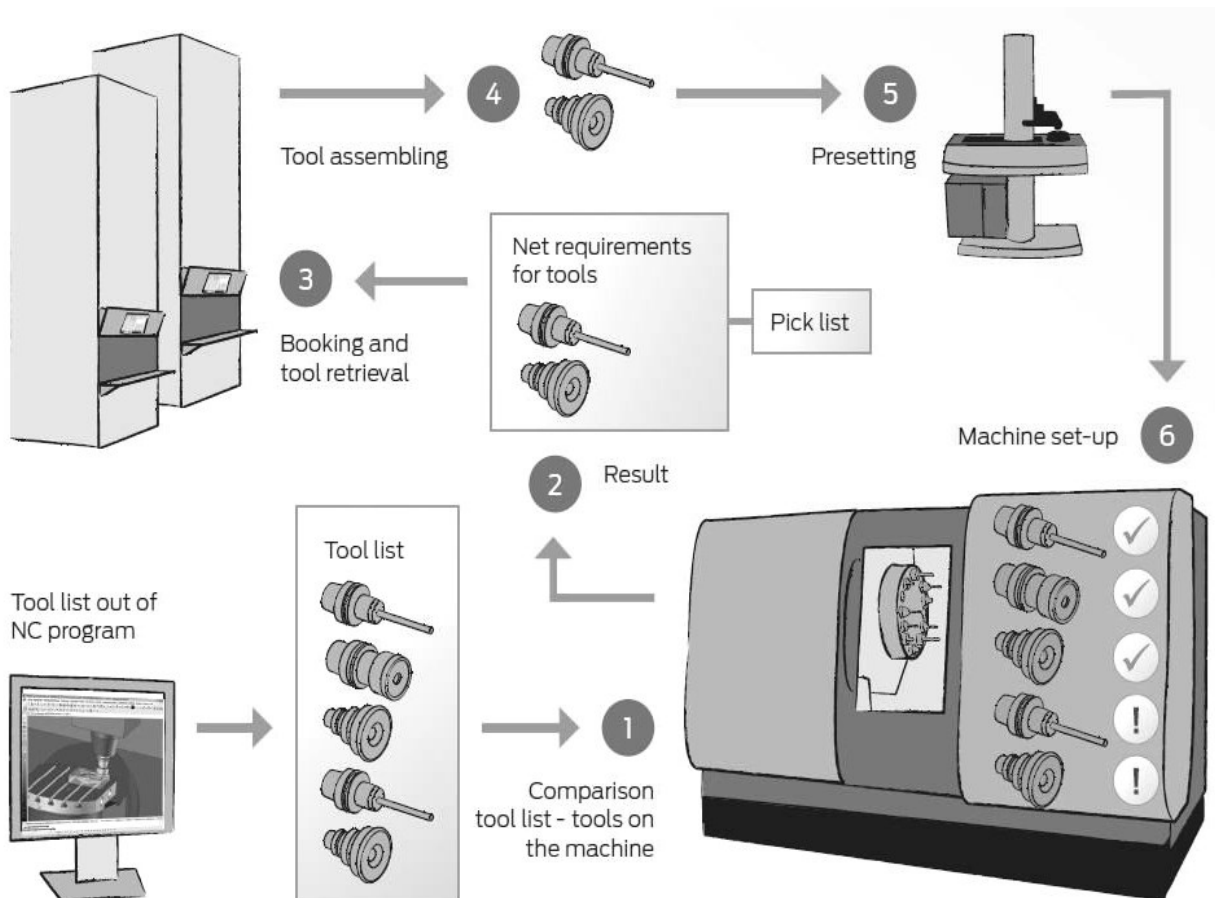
Providing tool lists for production with TDM's Machine Tool Manager
